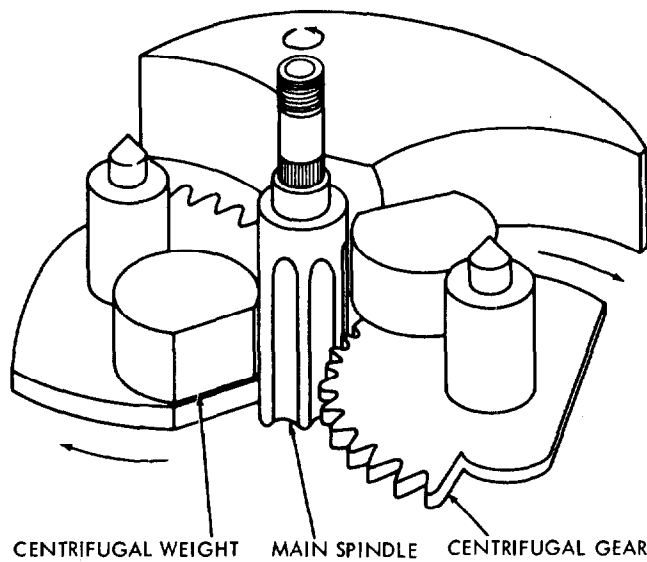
Mechanical Time Fuze Mk 57 Mod 2, Centrifugal Gear Assembly
